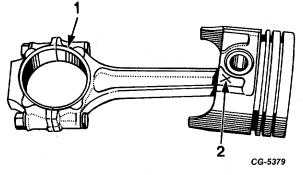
Mark Piston for Identical Reinstallation on Connecting Rod
